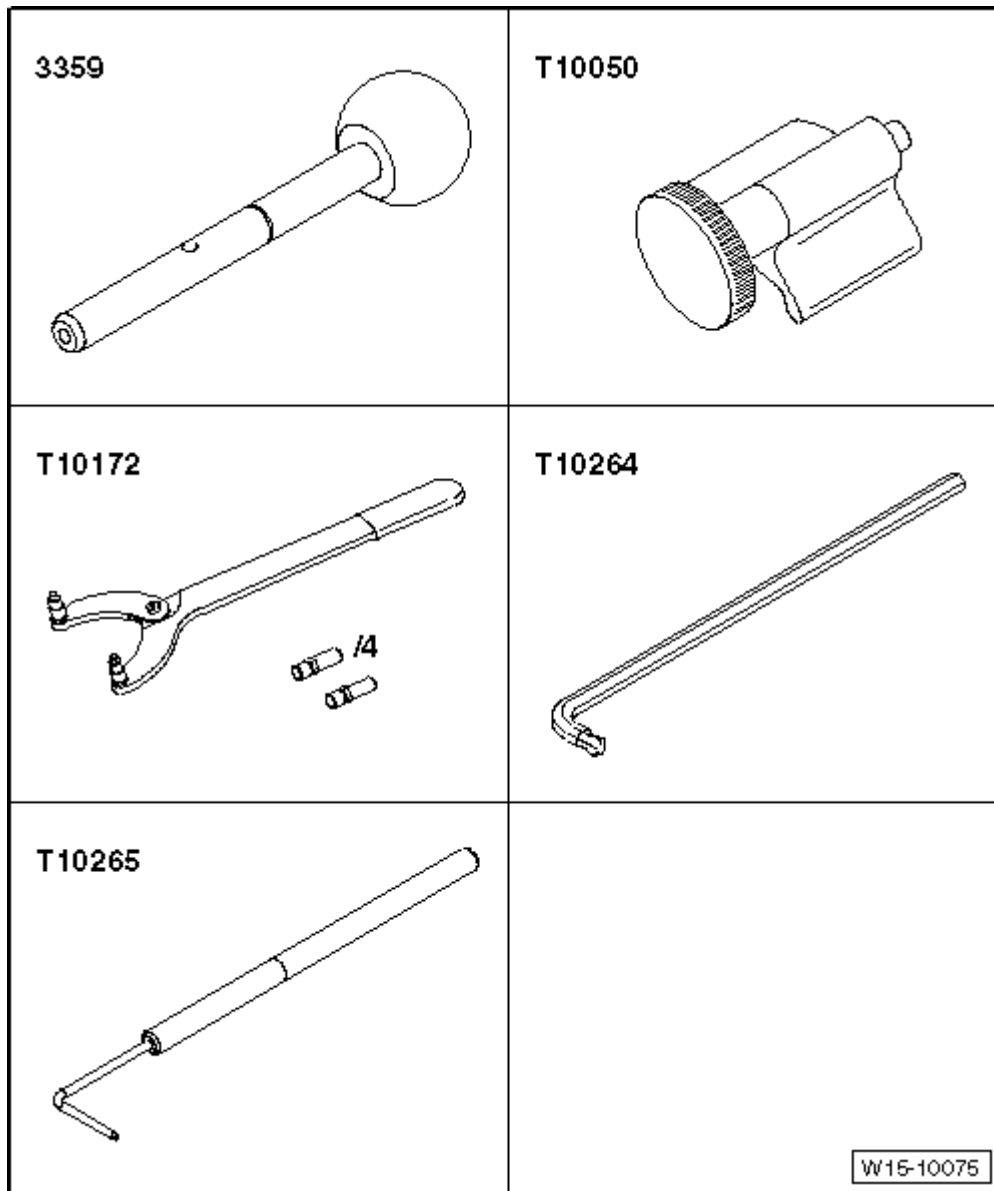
Identifying Diesel Injection Pump Remove/Install Components
